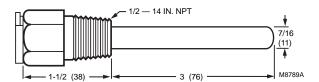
Approximate immersion well dimensions in inches (mm) for all models except L4006C and L6006B.
